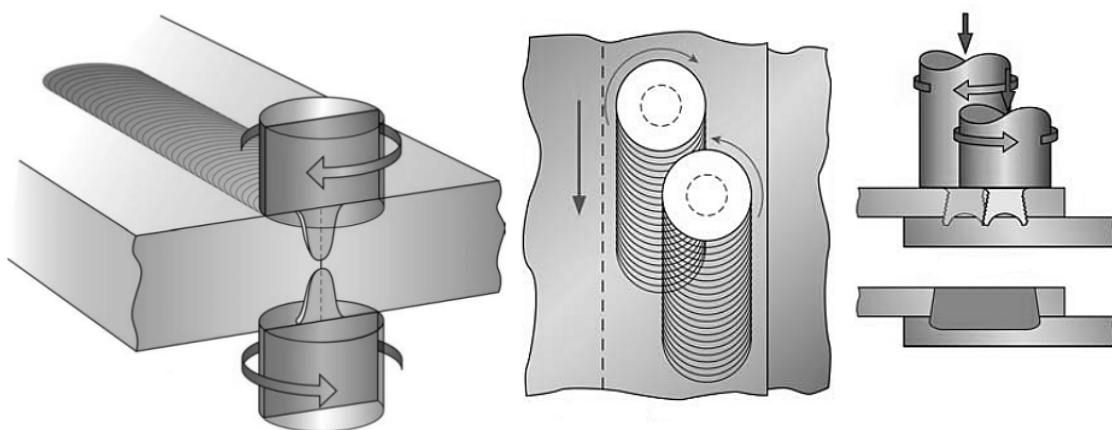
Principle of FSW using two tools: both-sided friction stir welding on the left and Twin-Stir™ technology, applied on lap joints, on the right [38]
